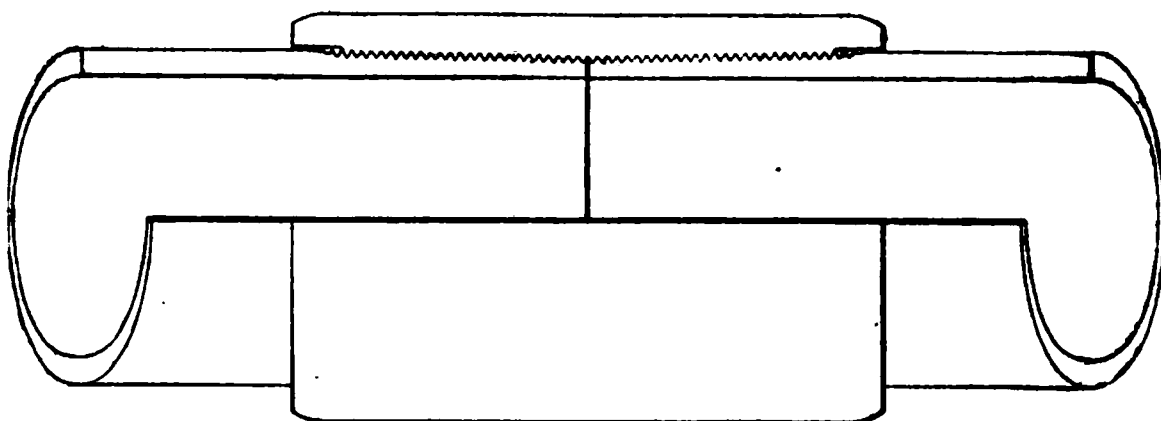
Typical Section of California Diamond BX Drive Pipe
